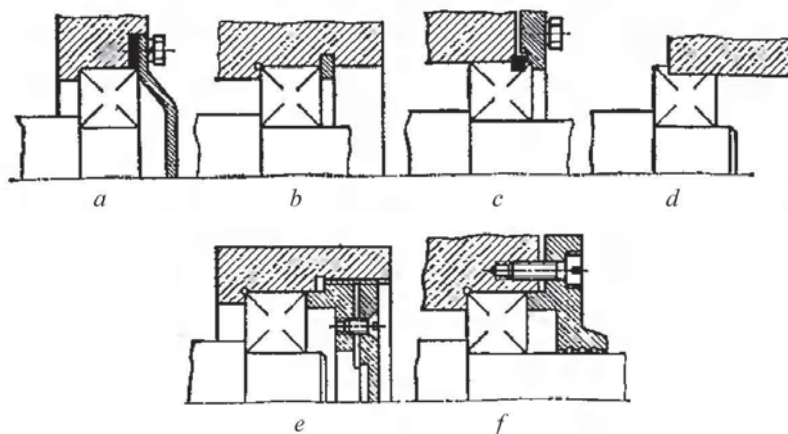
Fastening the outer ring of bearings in the housing [15]:
